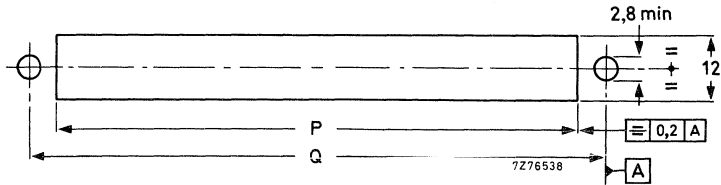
Panel cut-out for the male part; see Table 4 for dimensions P and Q.
